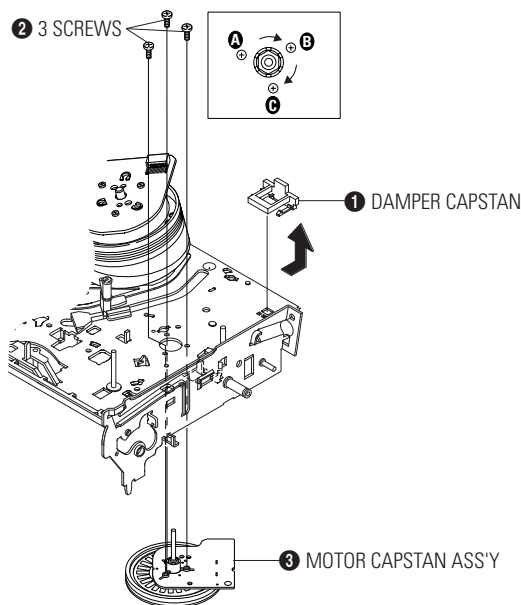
Damper Capstan, Motor Capstan Ass'y Removal
